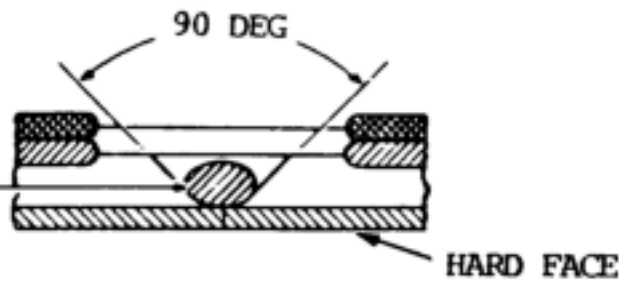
Welding repair of gouges in surface of homogeneous armor plate.
